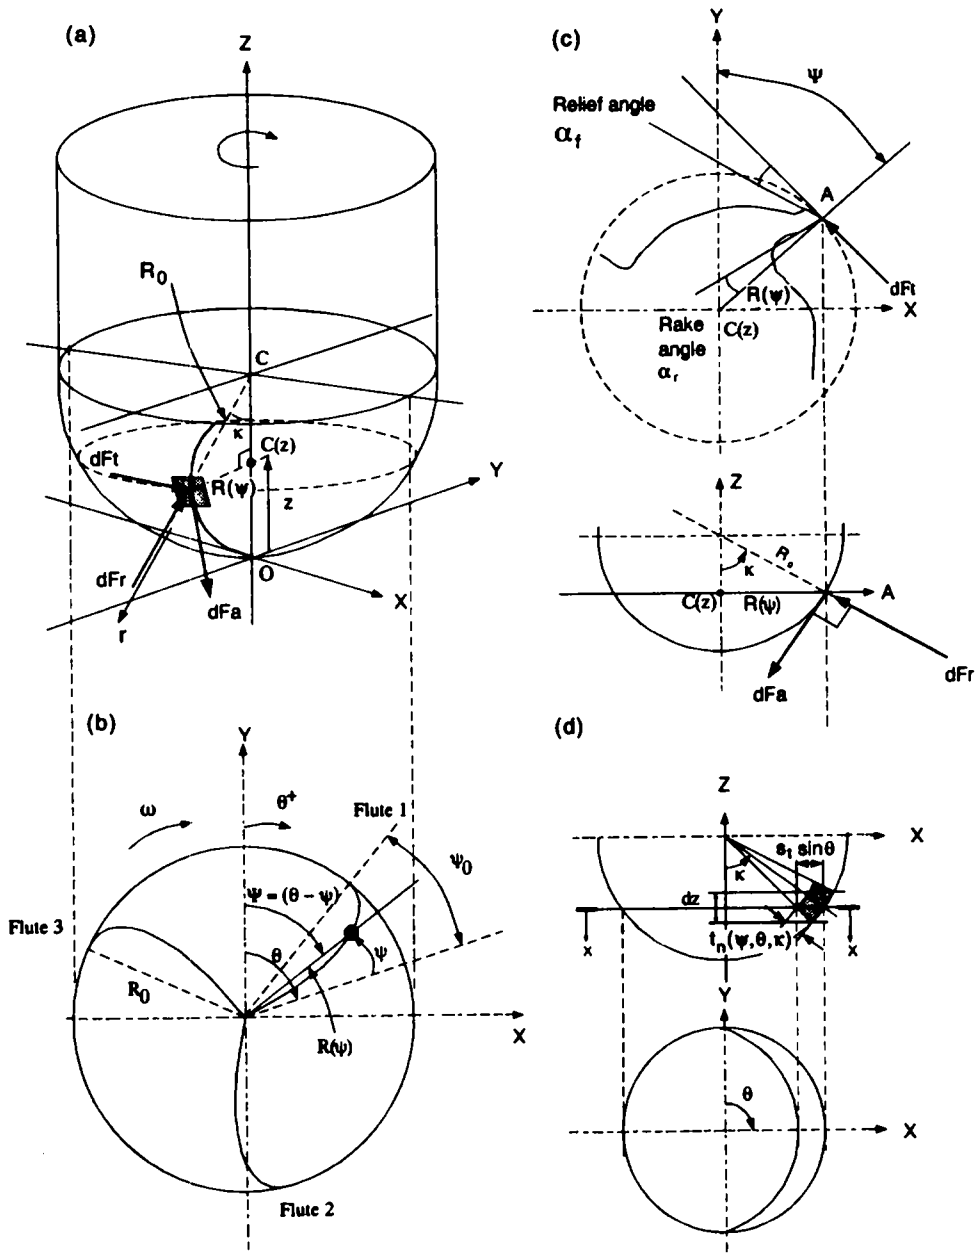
Geometry and tool coordinates for a ball milling cutter.
